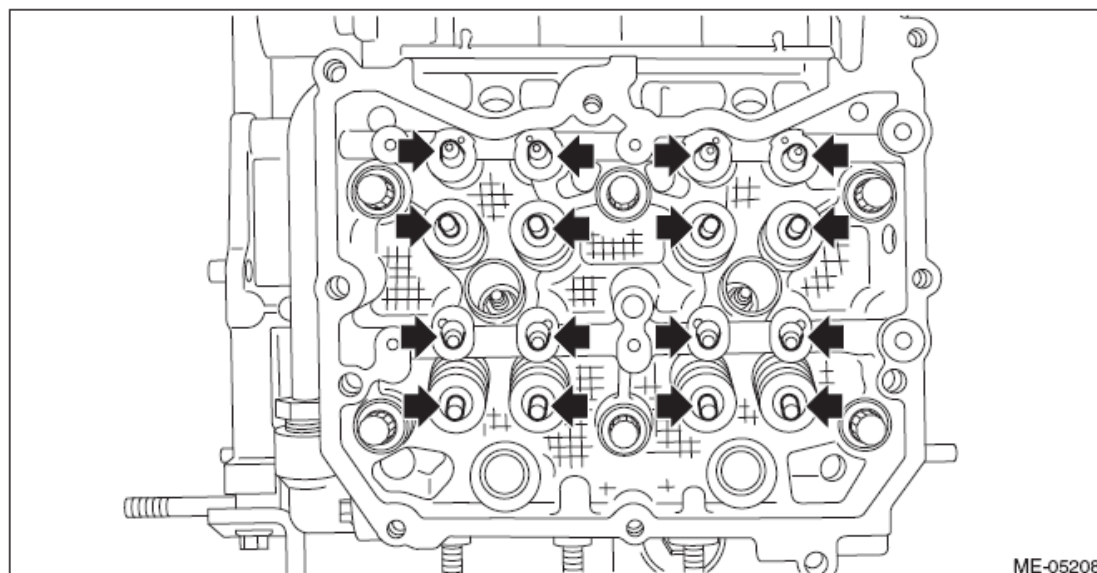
Locating Valve Shim And Roller Rocker Arm Pivot
